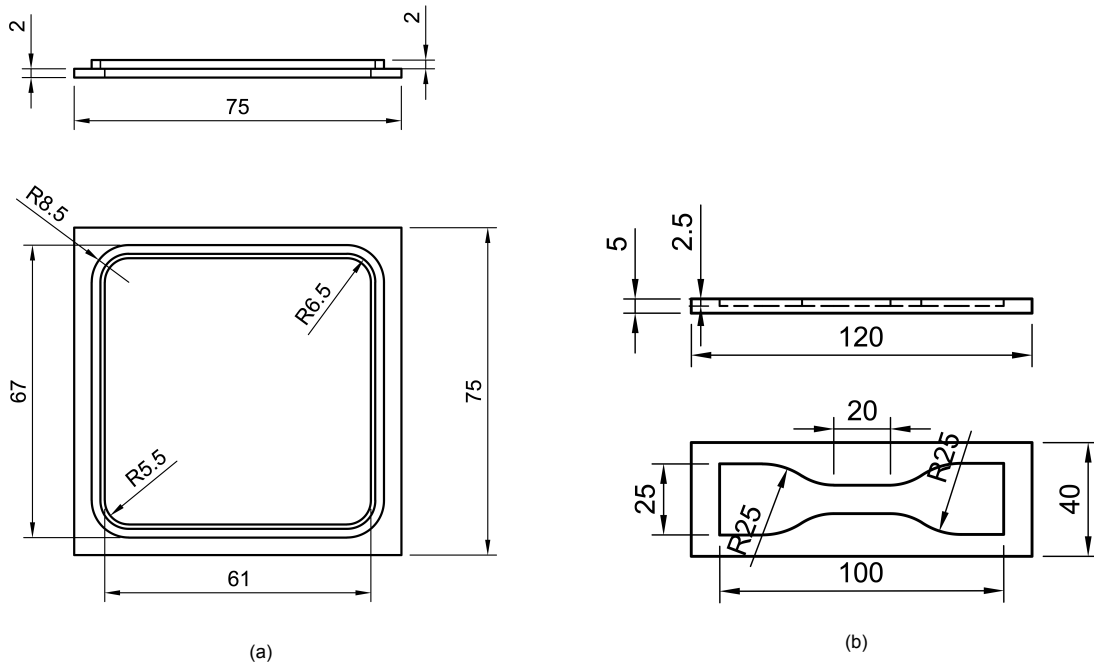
Drawing of side- and top-view of: (a) The dimensions of the middle part of the hinge mold, introducing a dent in one half of the hinge shape. (b) The dimensions of the mold of the specimen, used for the tensile strength tests to obtain its material properties.
